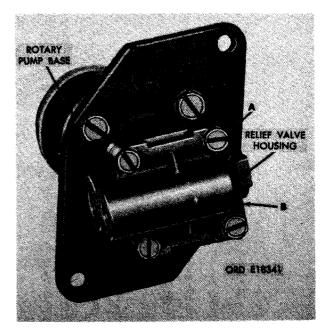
REMOVING OR INSTALLING RELIEF VALVE HOUSING.
